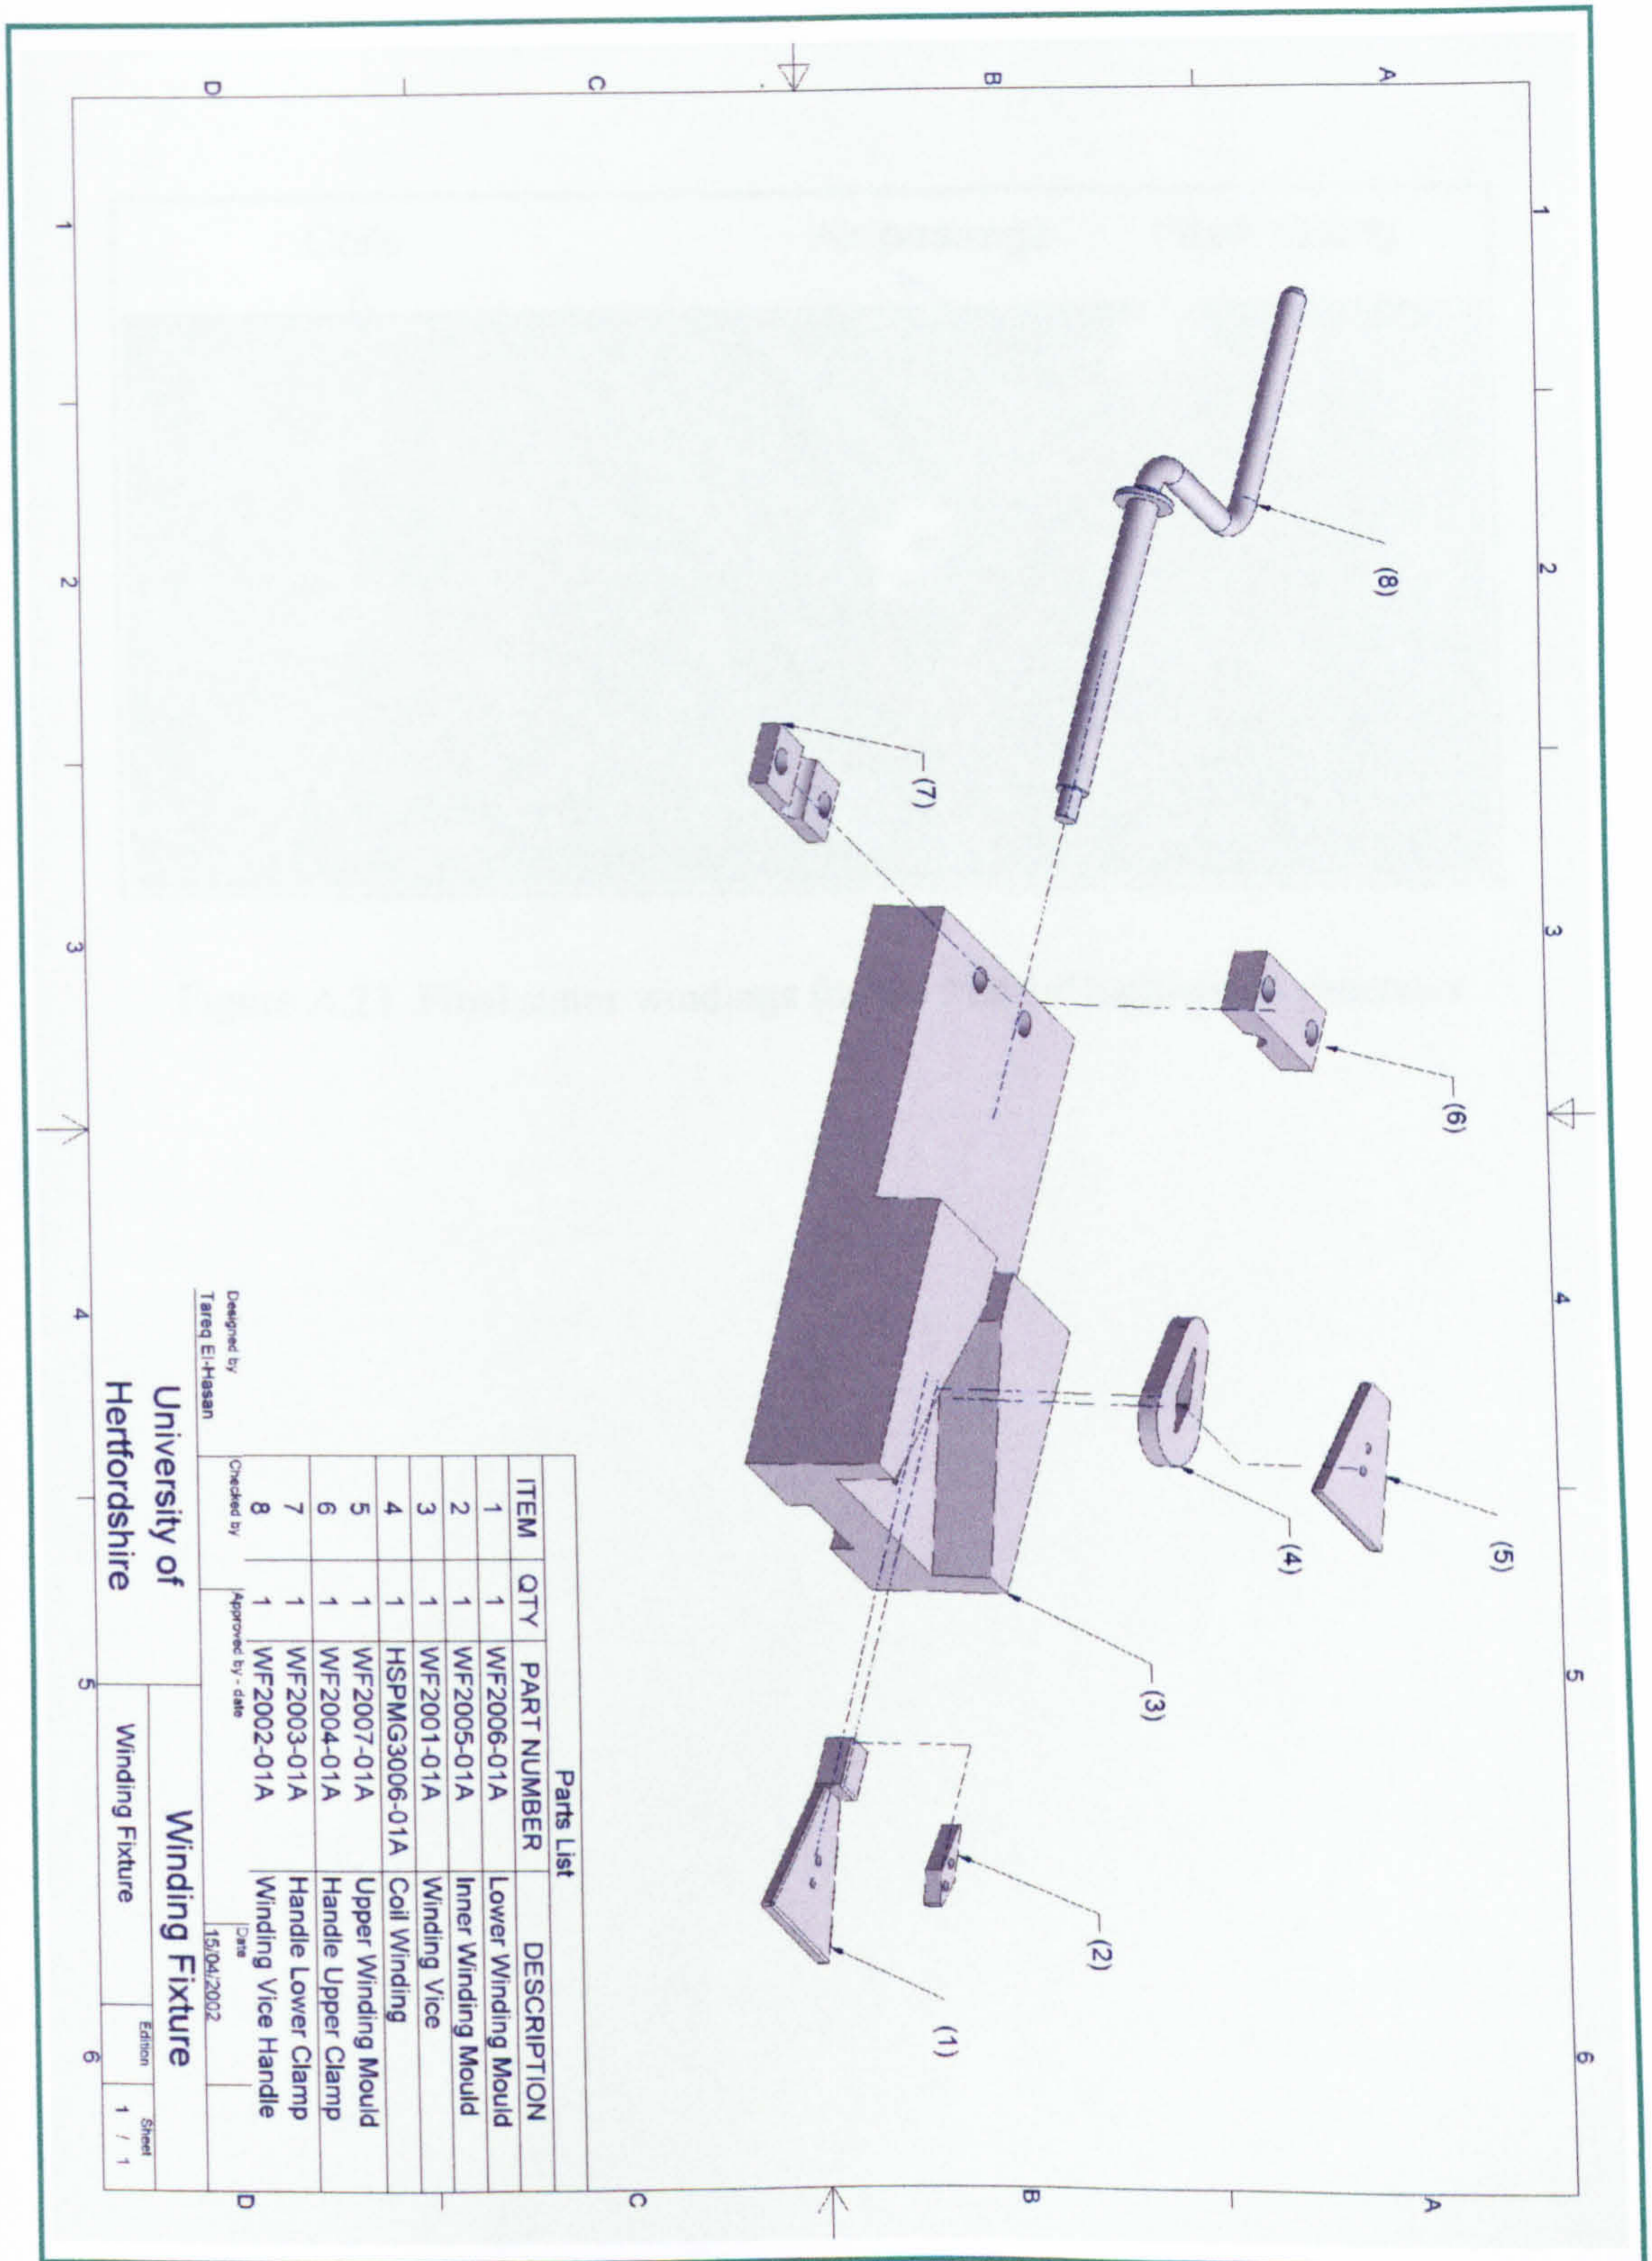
View of the winding fixture and mould used in the winding process for the coils of the *PMAF* high-speed generator
